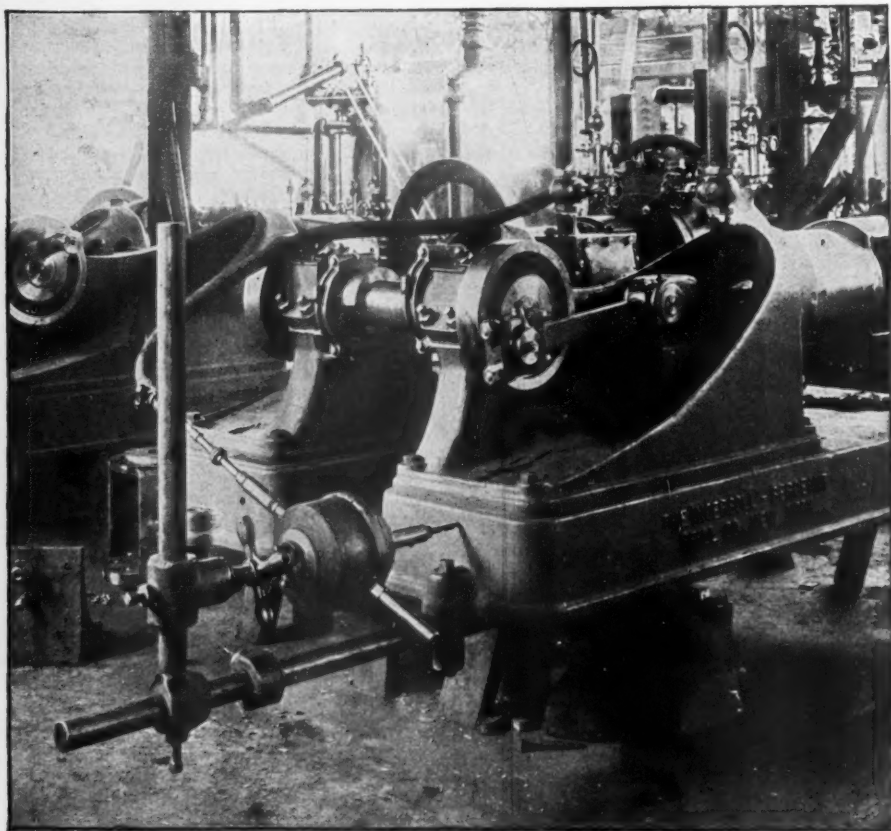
FIG. II—A METHOD OF MOUNTING A PNEUMATIC DRILL, ILLUSTRATING ITS PORTABLE CHARACTER.
